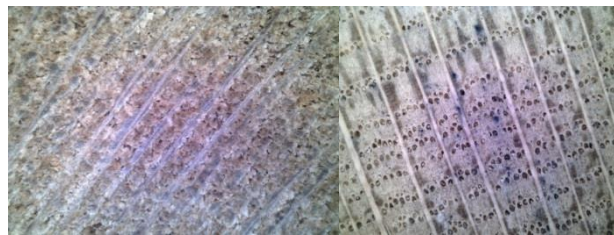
Left: conventionally machined; Right: AWJC machined surface oak wood surface
